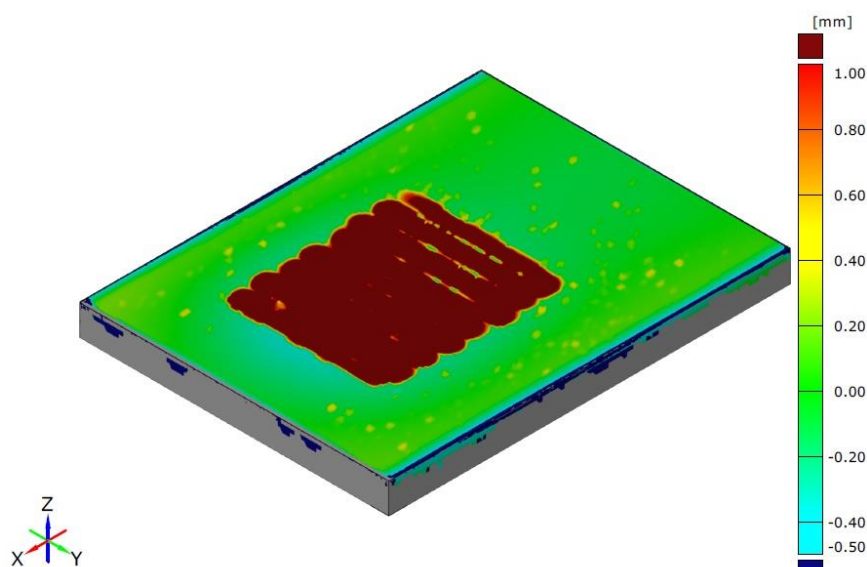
Scanned surface deposited with welding parameters of wire feed rate 2m/min and 17V
